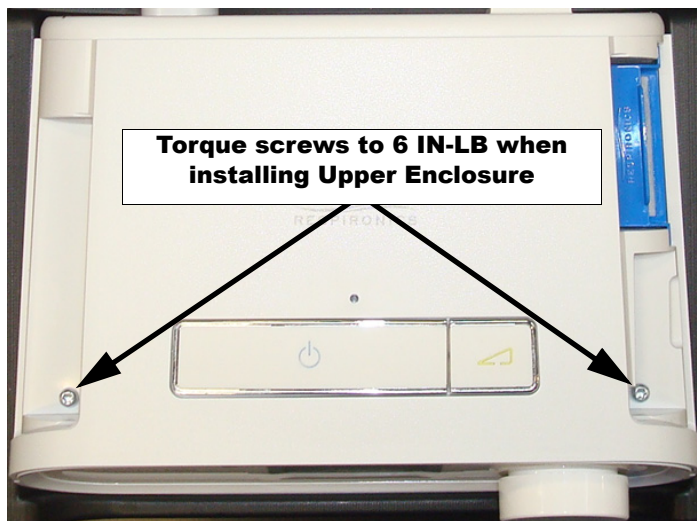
UPPER ENCLOSURE WITH KEYPAD INSTALLED
